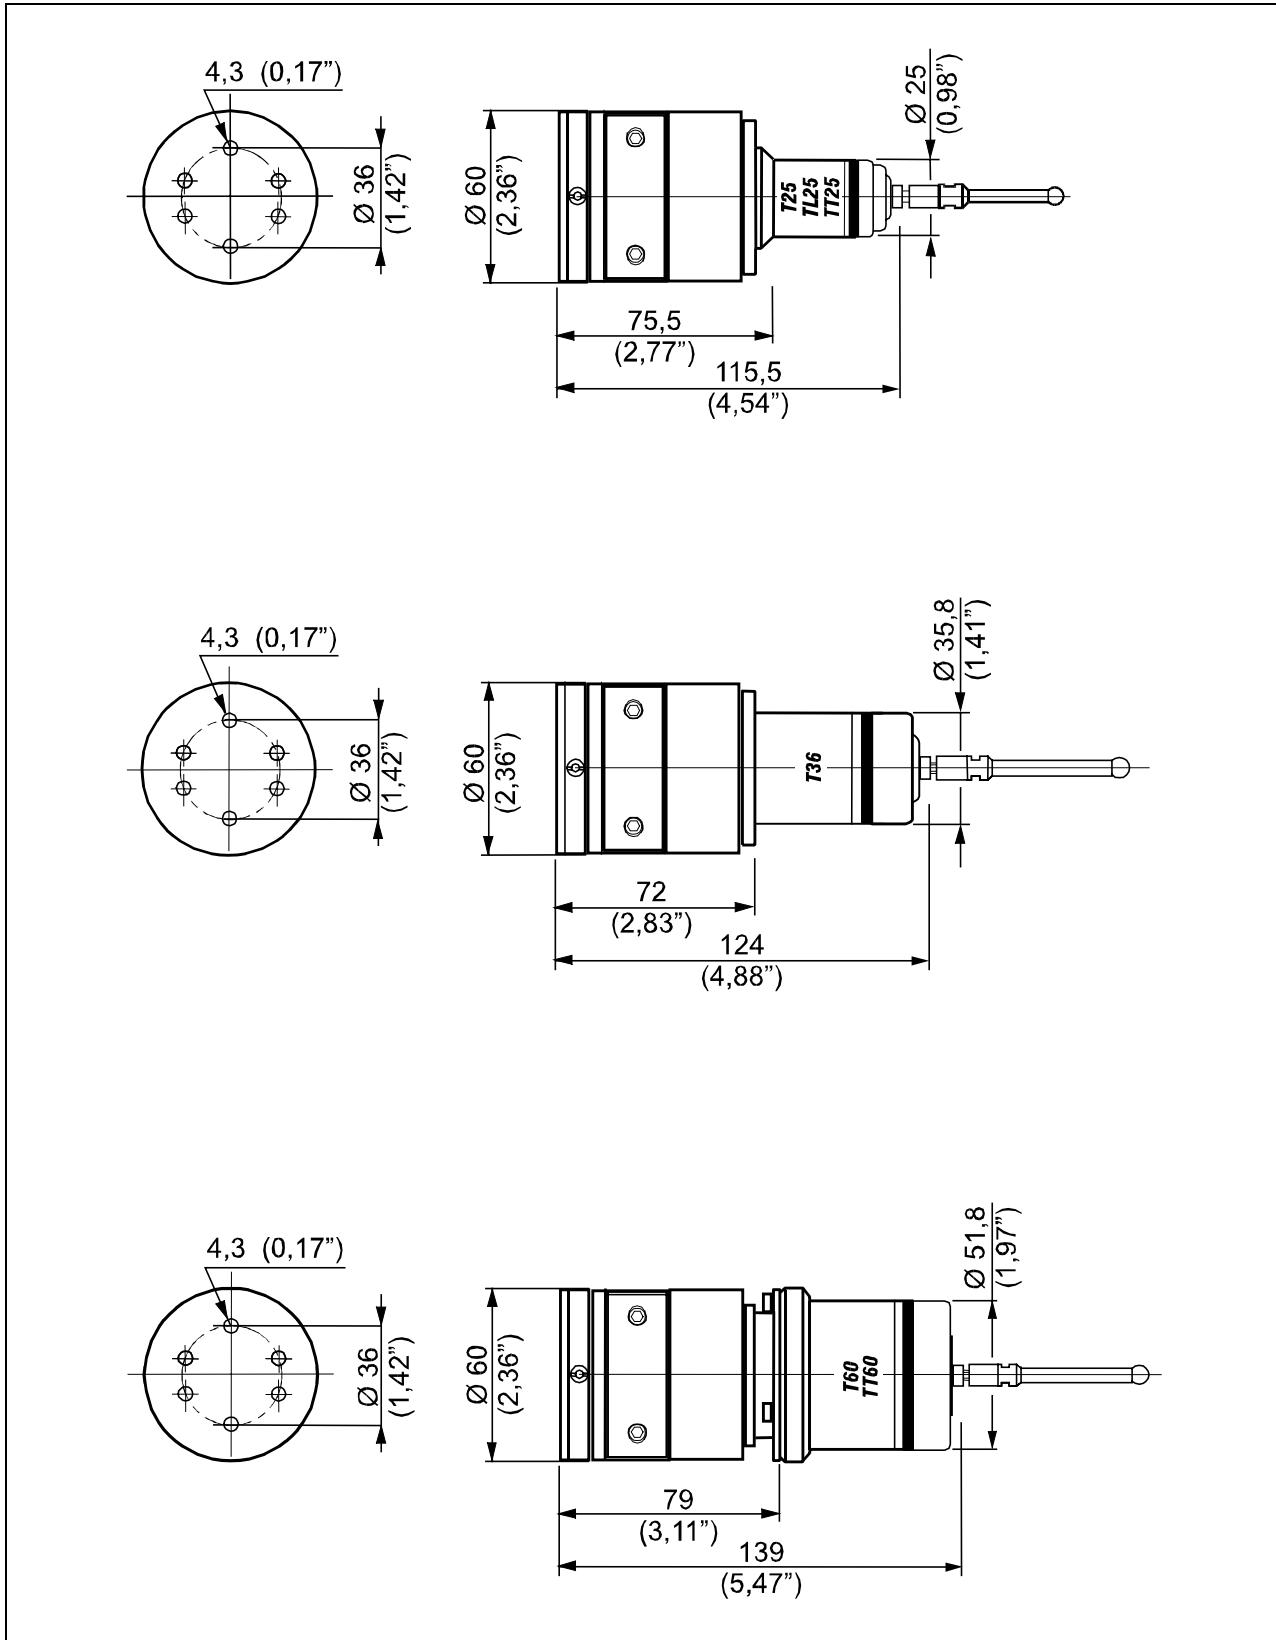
Dimensions of the transmitter with adjusting flange.
